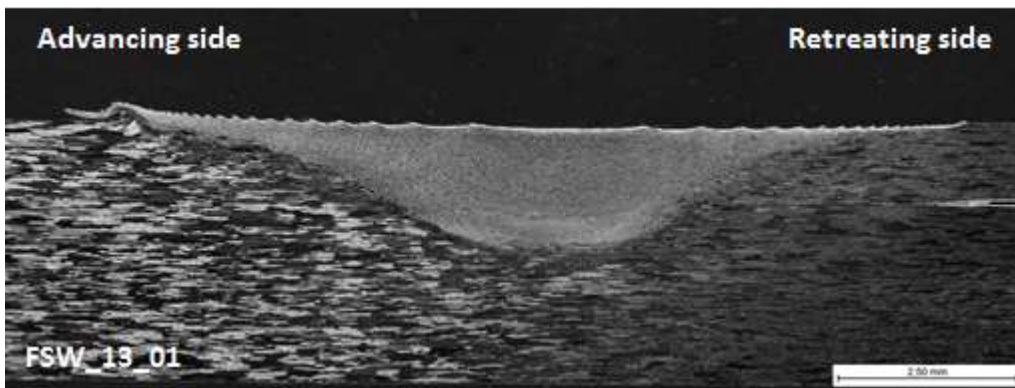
Cross-section of a FSLW joint produced using a 1 mm thick AA2198-T8 sheet on top of a 2.3 mm thick AA2198-T8 sheet.
